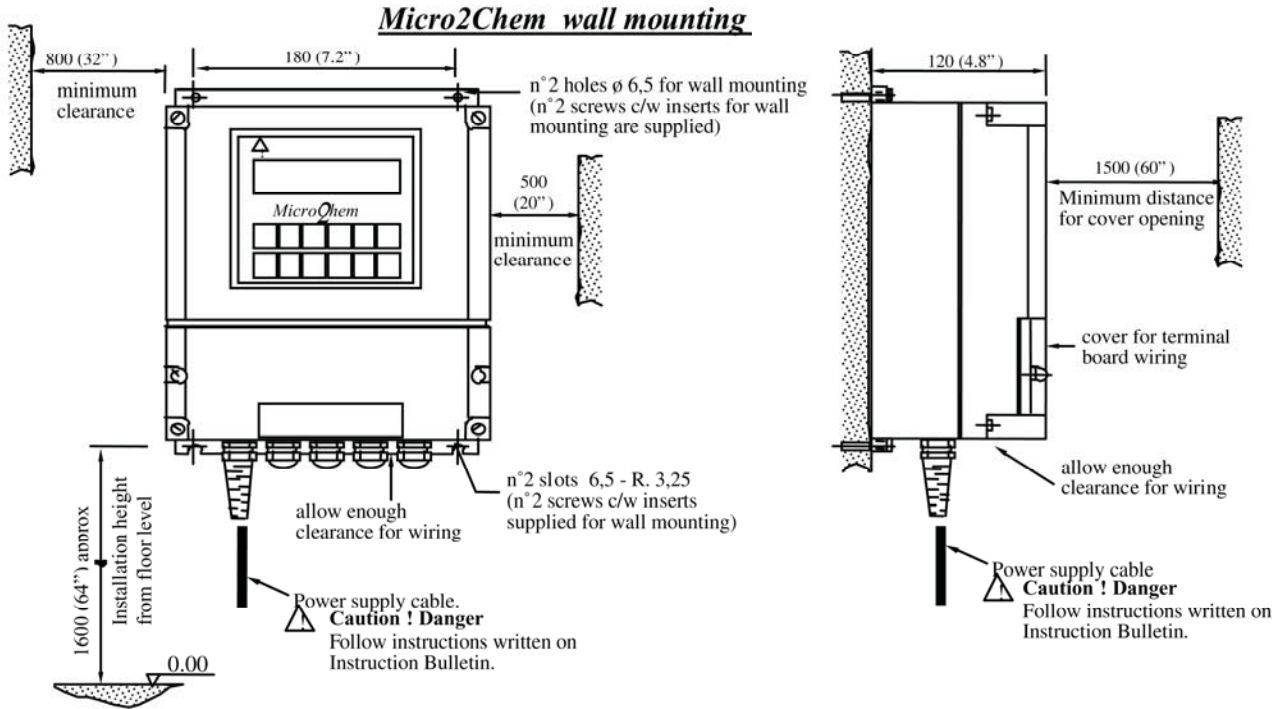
Typical Wall-mounting Installations of MicroChem[®]2
